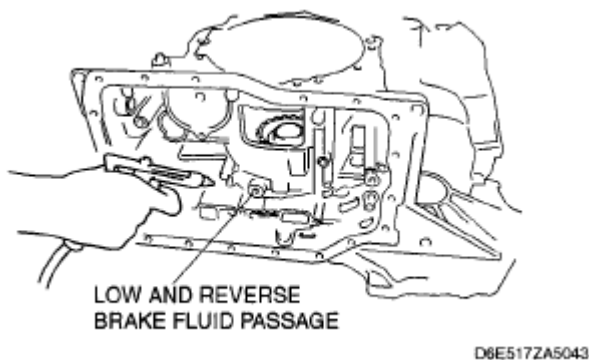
Applying Compressed Air To Low And Reverse Brake Piston
